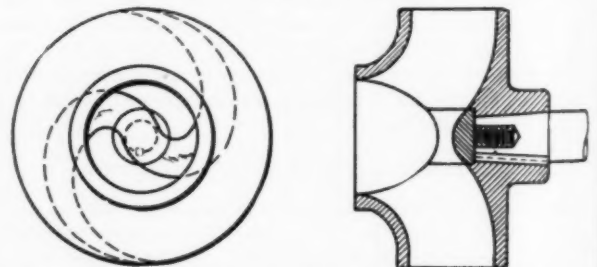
NEW TYPE WOOD PAPER-STOCK IMPELLER, WITH IMPELLER BLADES TAPERED TO THE CENTER
